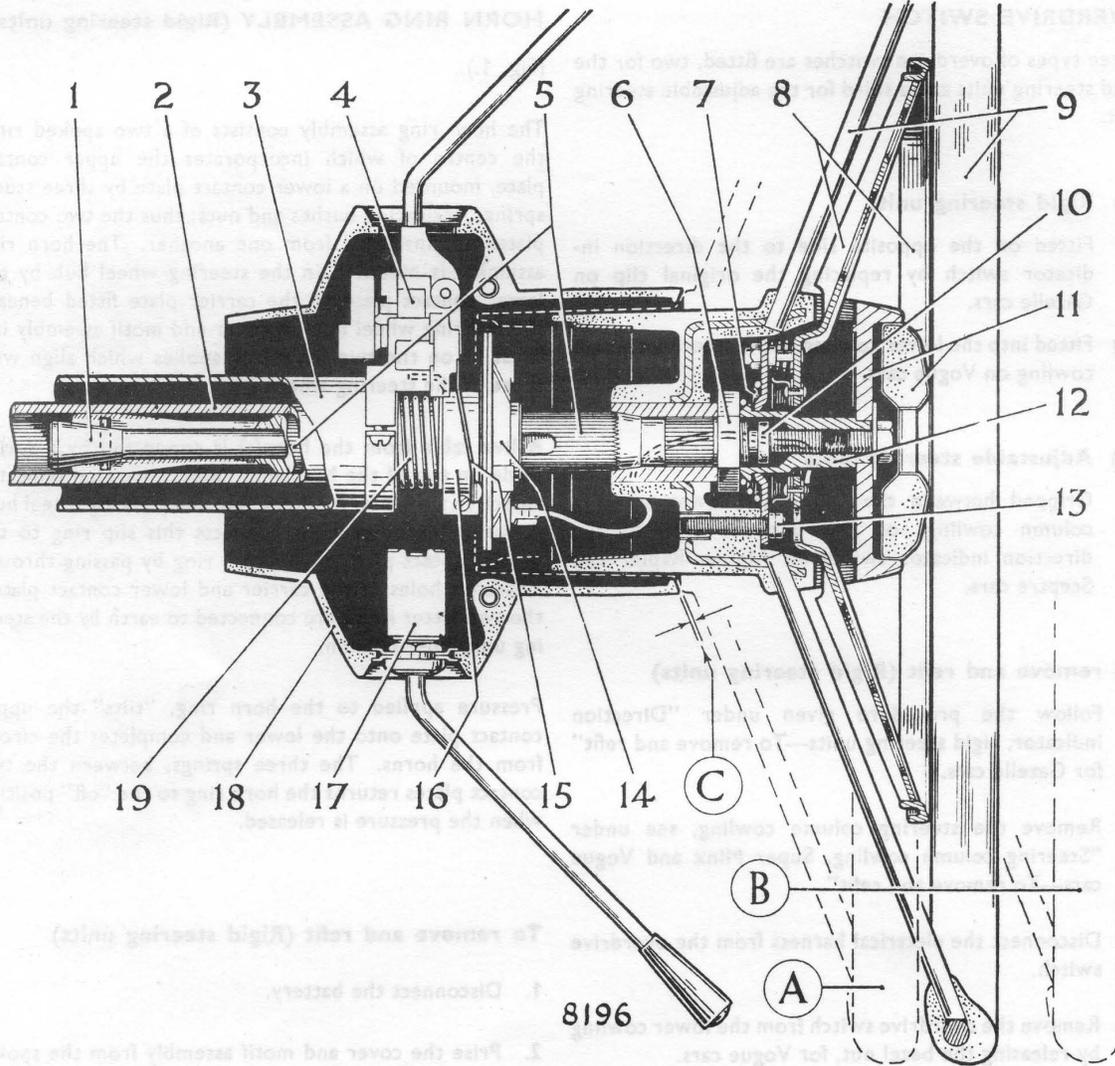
Cross section and cut away view of steering column cowl, switches, horn ring and steering wheel of the adjustable steering column.
